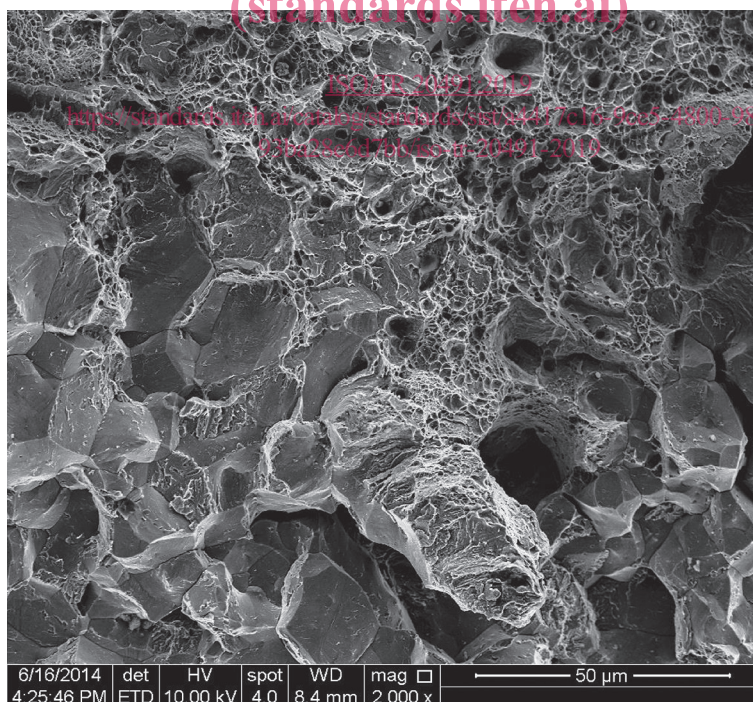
Fracture surface showing both brittle intergranular morphology resulting from HAC and ductile dimple morphology indicative of final fracture — Cr-Mo alloy steel (AISI 4135) at 530 HV, zinc electroplated
